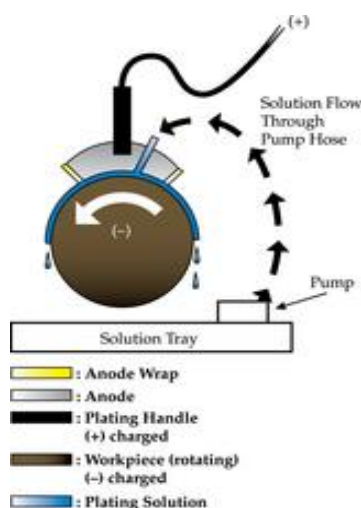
Illustration of brush plating on outer surface of round work piece [8].
